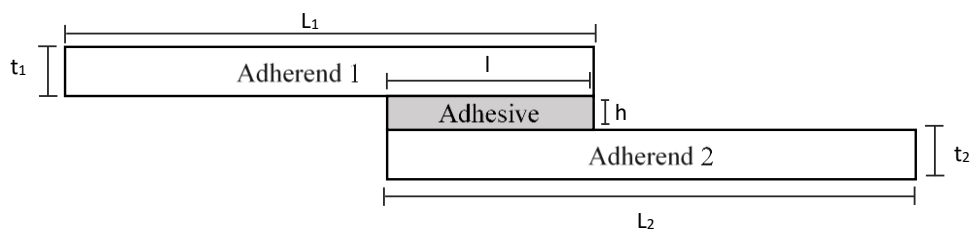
Single lap joint configuration with letter codes representing geometrical dimensions.
